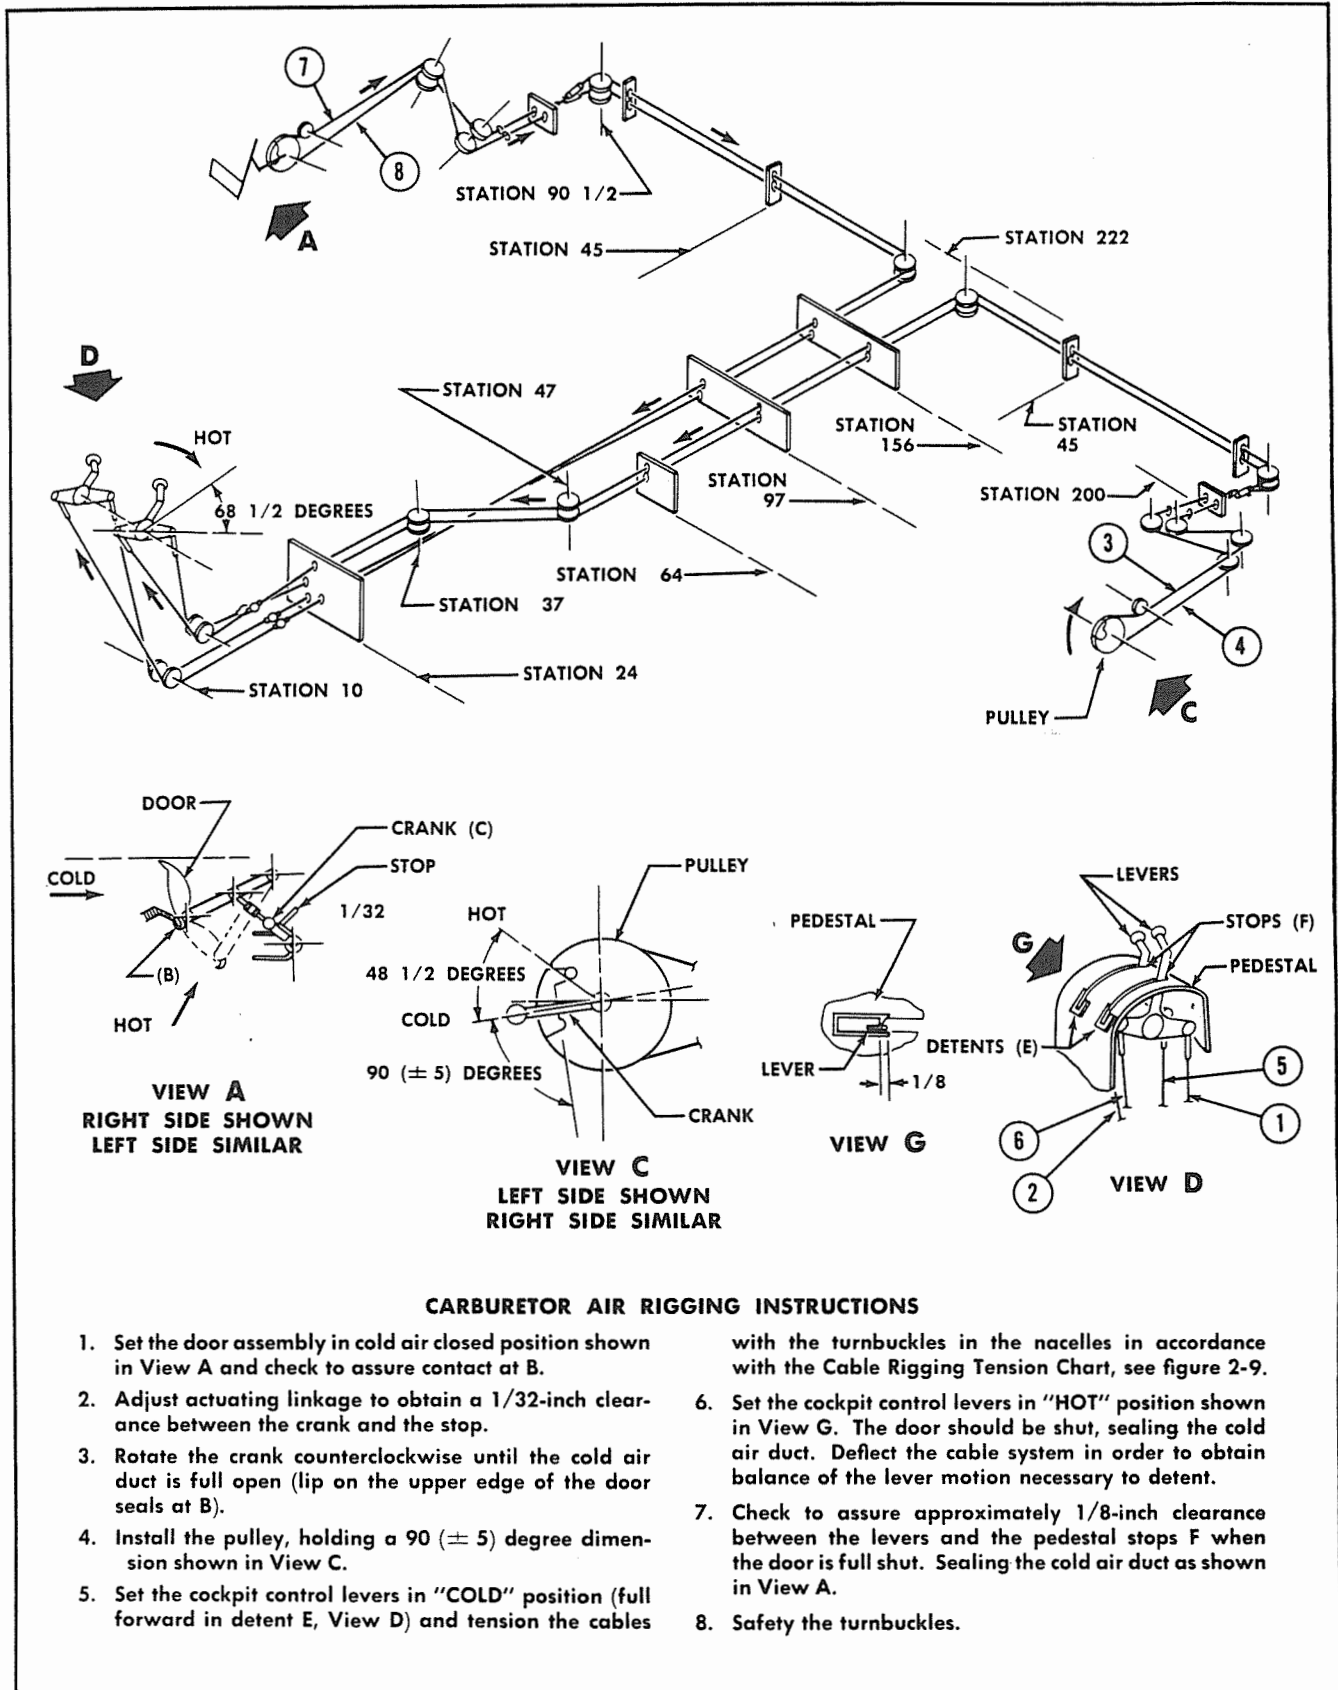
(Sheet 6 of 7 Sheets). Carburetor Air Control System – Adjustment Diagram
